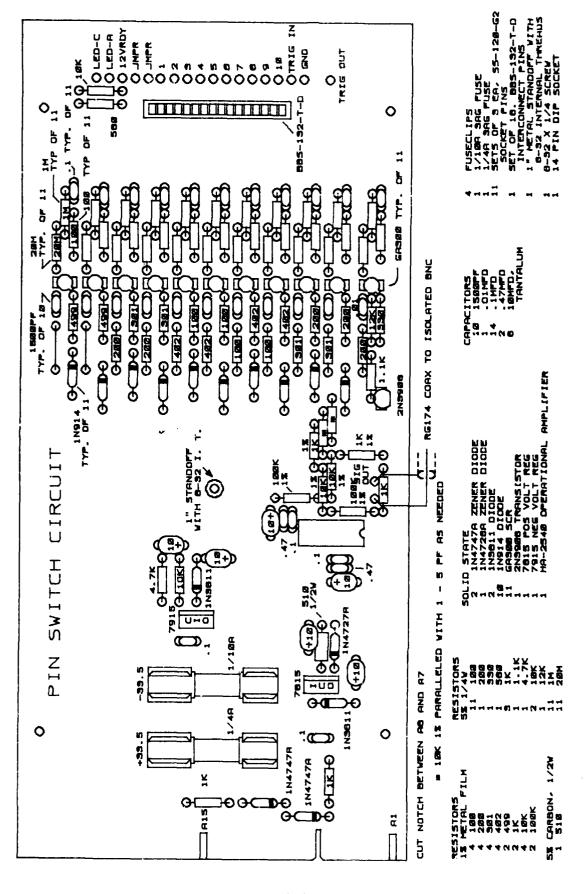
PIN SWITCH PRINTED CIRCUIT BOARD COMPONENT LAYOUT
